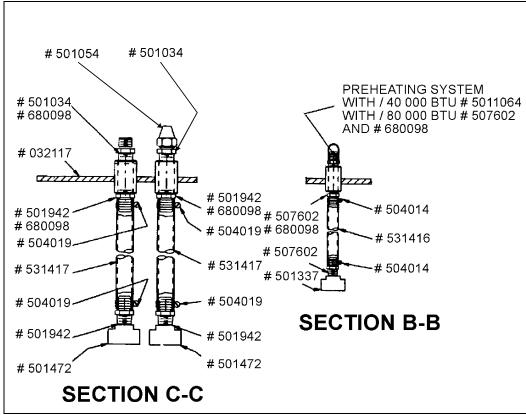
PICK-UP (SUCTION) TUBES ASSEMBLY
